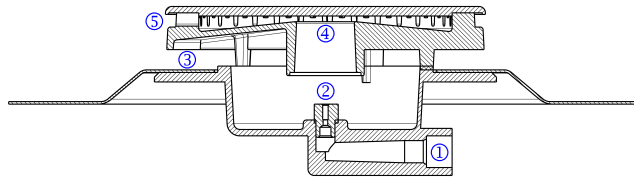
Parts of an atmospheric domestic gas burner. In the exploded view, from the bottom to the top the following components are shown: bowl, hob, injector, crown and cap.
